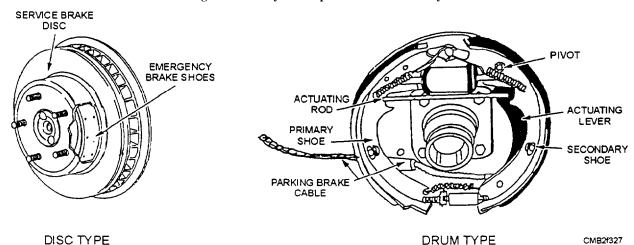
Automotive type parking/emergency brakes, axle mounted.
